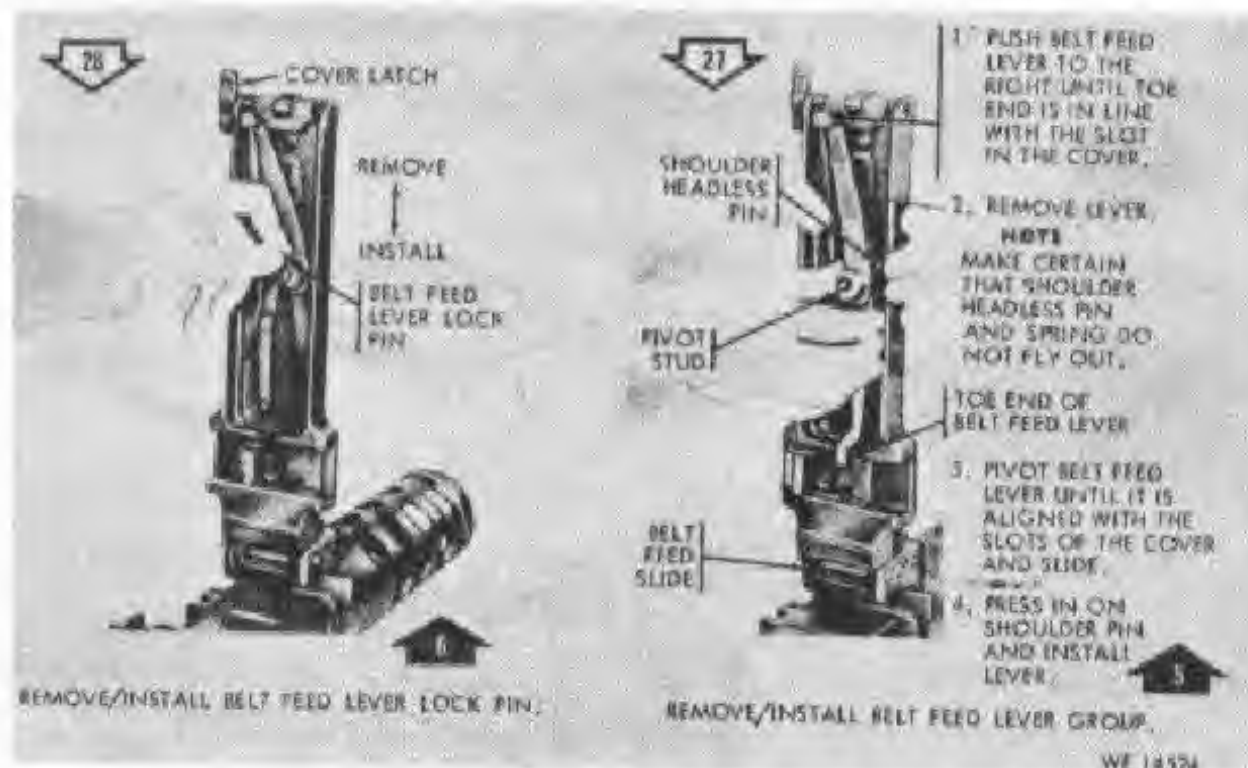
Disassembly/assembly of Caliber .50 Machine Gun, M2. (18 of 20)
